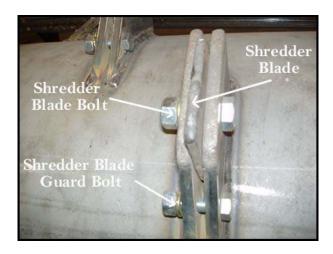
Shredder Rotor Assembly Showing Blade Position
